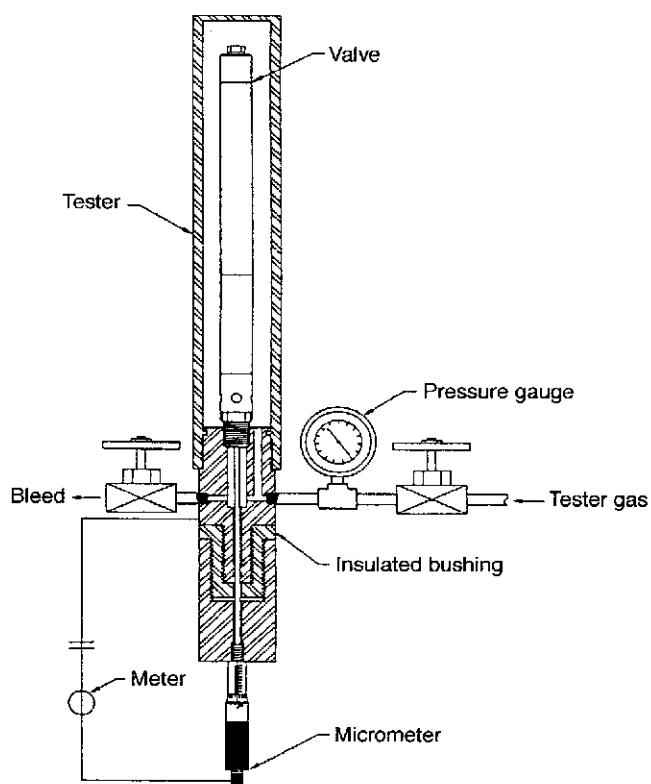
Typical Gas Lift Valve Probe Test Fixture
